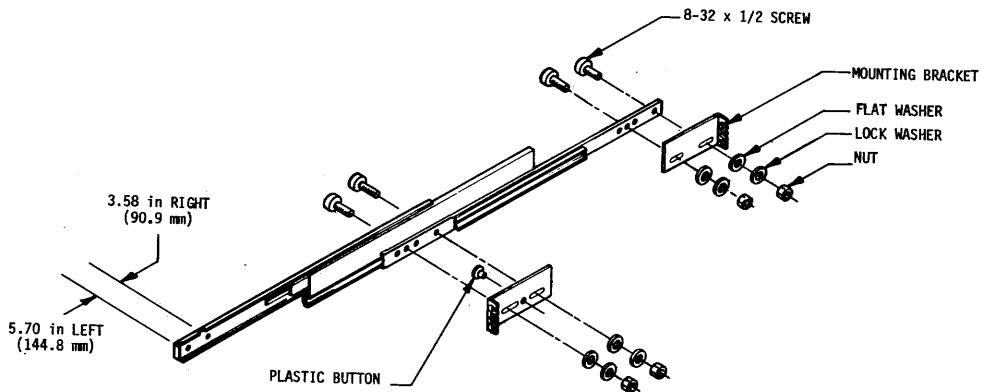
SLIDE AND BRACKET ASSEMBLY
